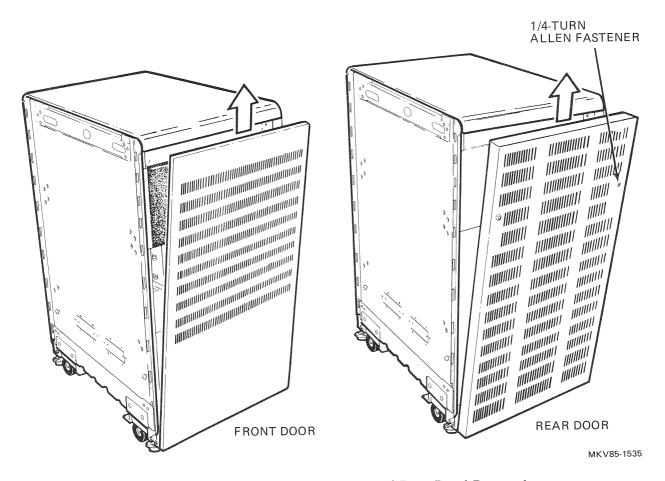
CIPA Cabinet - Front and Rear Panel Removal
